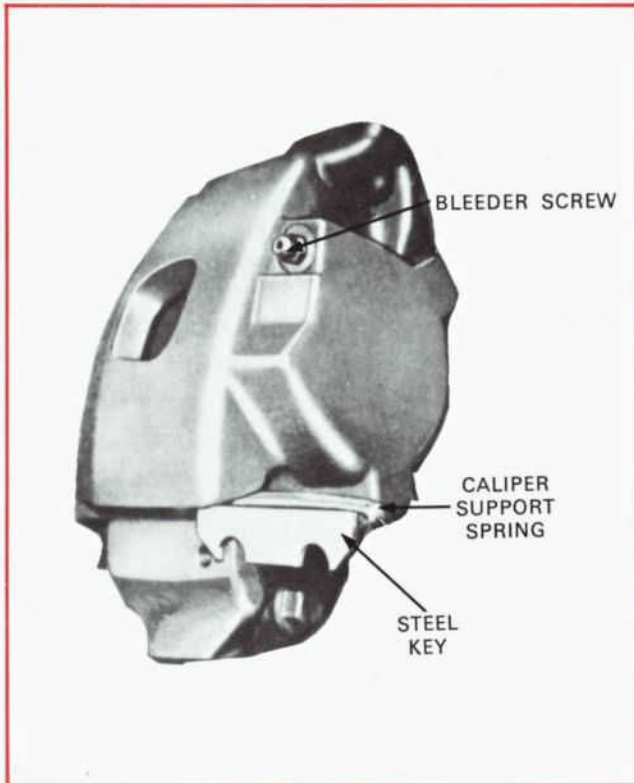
Note how the caliper support spring and the key are installed on the sliding caliper type of disc brake.
